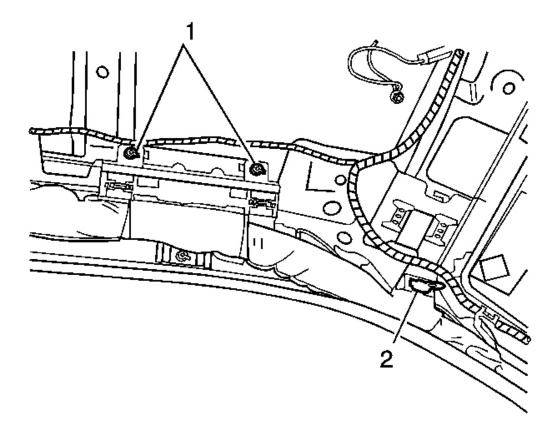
View Of Forward Curtain Clip & Air Bag Module Bolts Courtesy of GENERAL MOTORS CORP.
